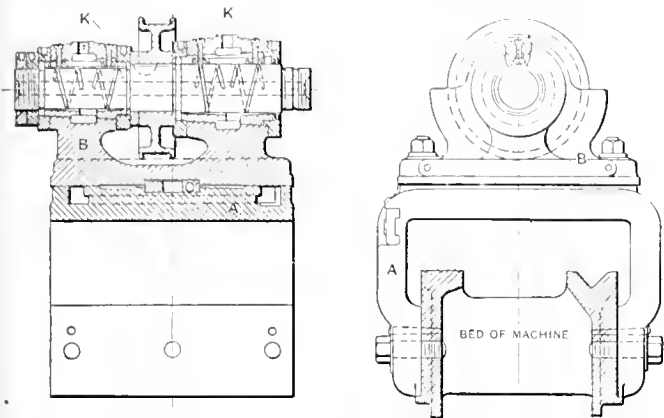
Work Spindle Head and Method of Supporting it on Bed.
